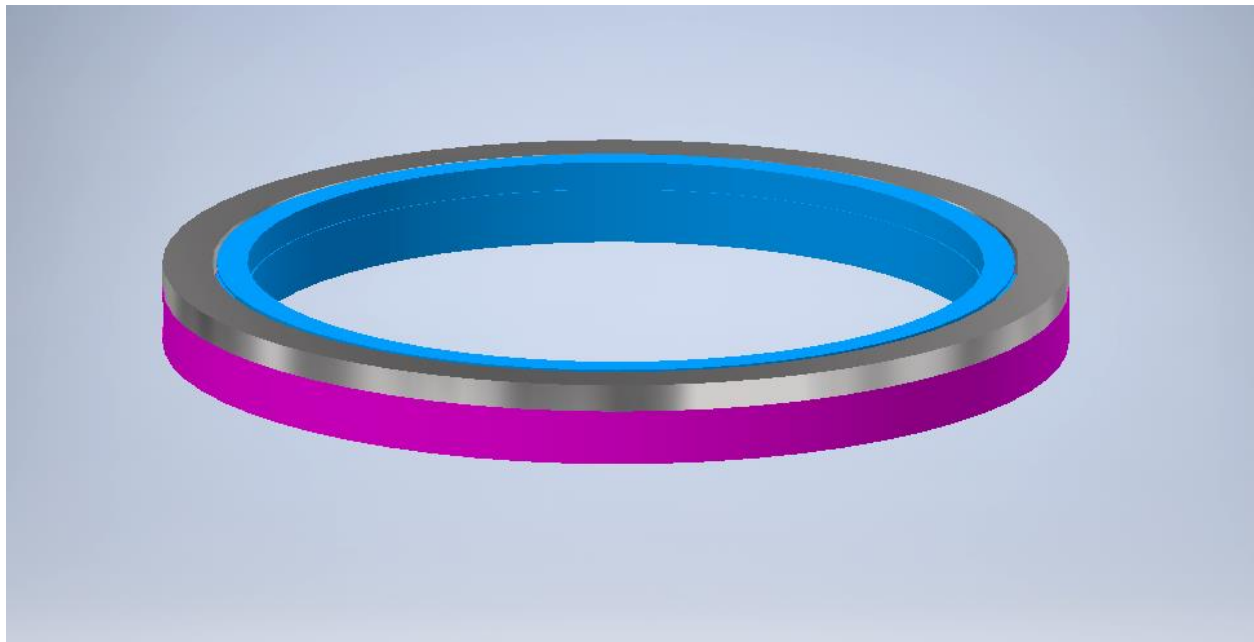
CAD rendering of bearing design with Aluminum sealing surface (silver). This sealing surface will be attached to the outer bearing race (pink/purple)
